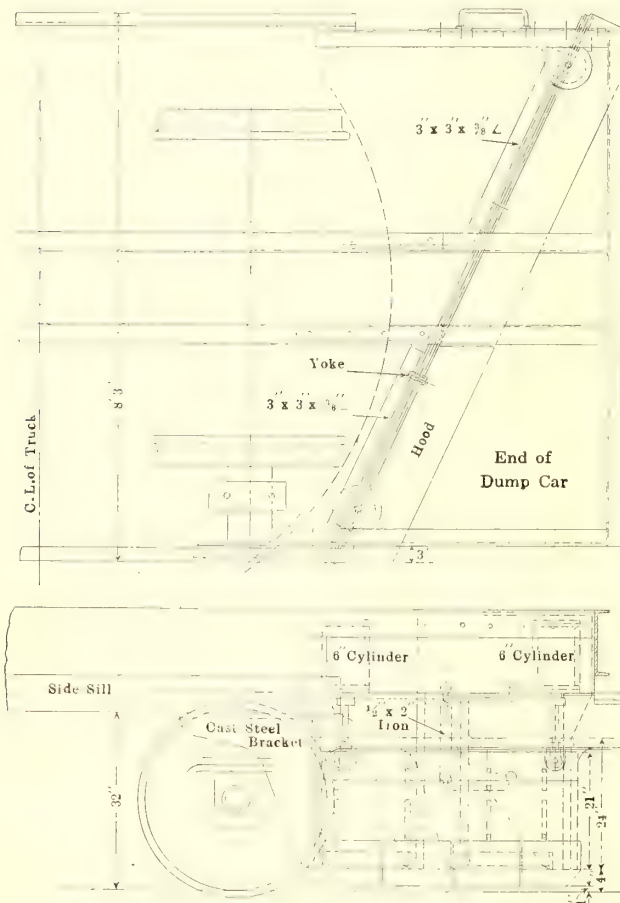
SNOW FLANGES AS MOUNTED UNDER MULTIPLE-DUMP CAR
